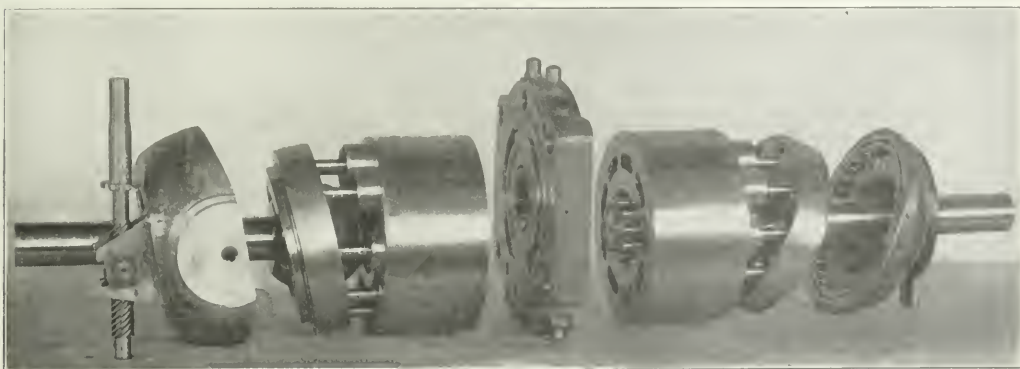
Working Parts of the Hydraulic Speed Gear.
